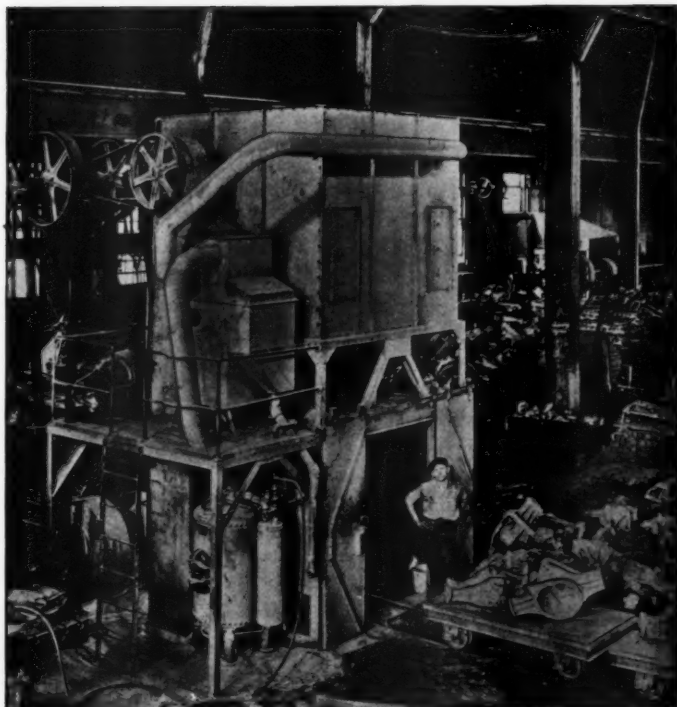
SAND-BLAST ROOM WITH SAND SEPARATING AND ELEVATING SYSTEM
